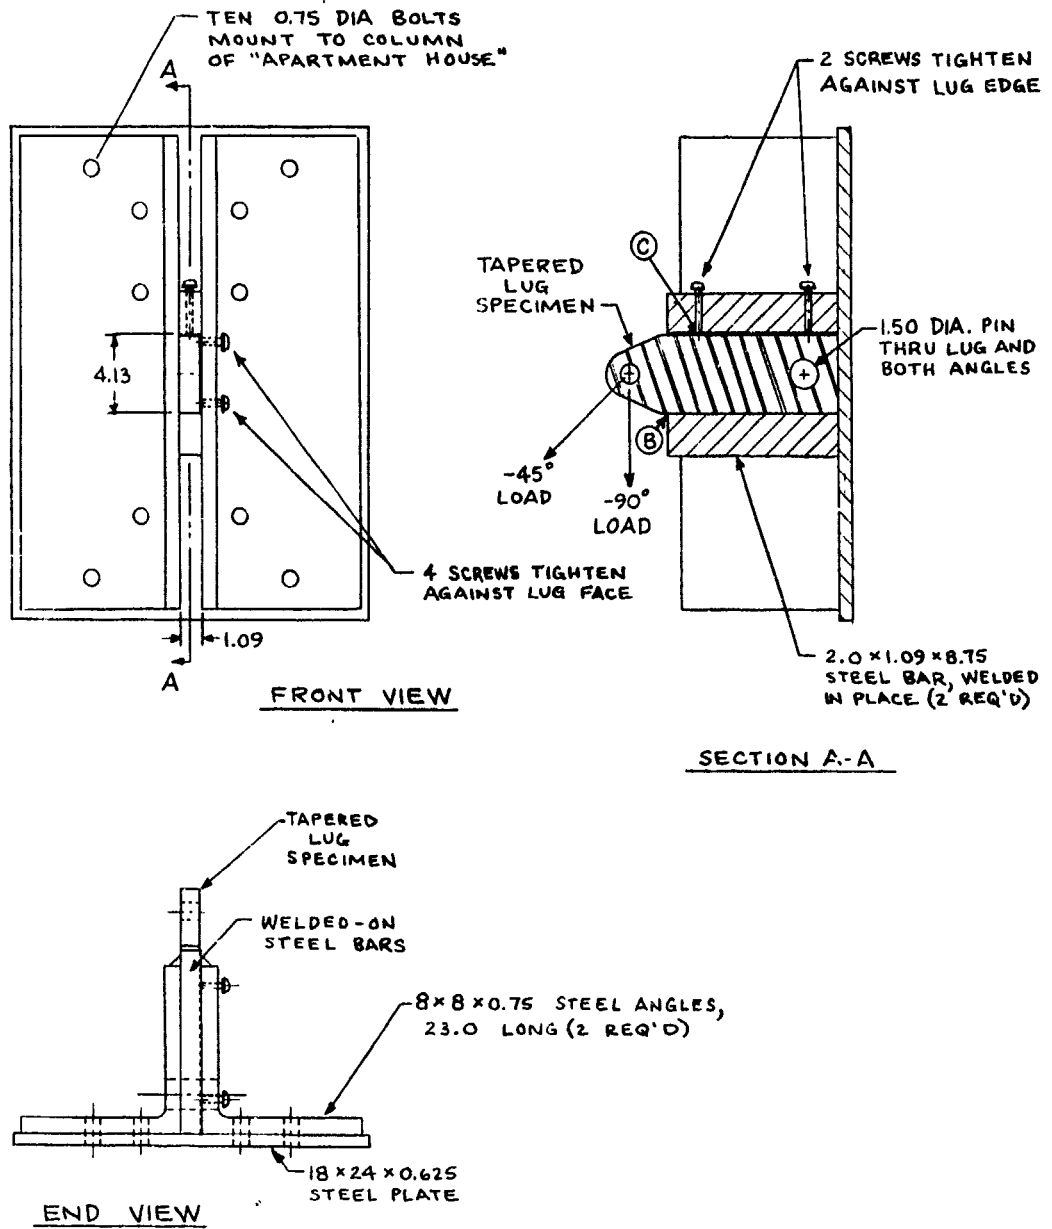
Holding Fixture for Tapered Lugs Subjected to Off-Axis Loading
